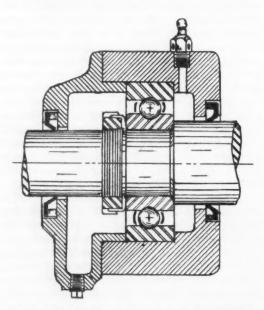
Ideal ball-bearing housing has pressure-relief type grease fitting close to bearing, and a sump with drain plug for removing worn-out grease or sludge
